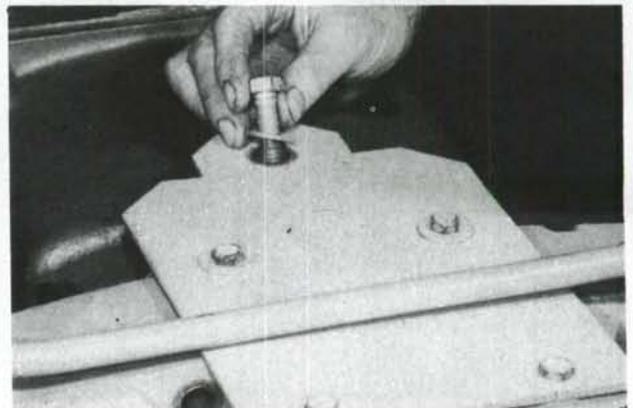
Mount connector plate between top of range gearbox and rear axle housing to prevent housings from separating during removal of power shift unit.
